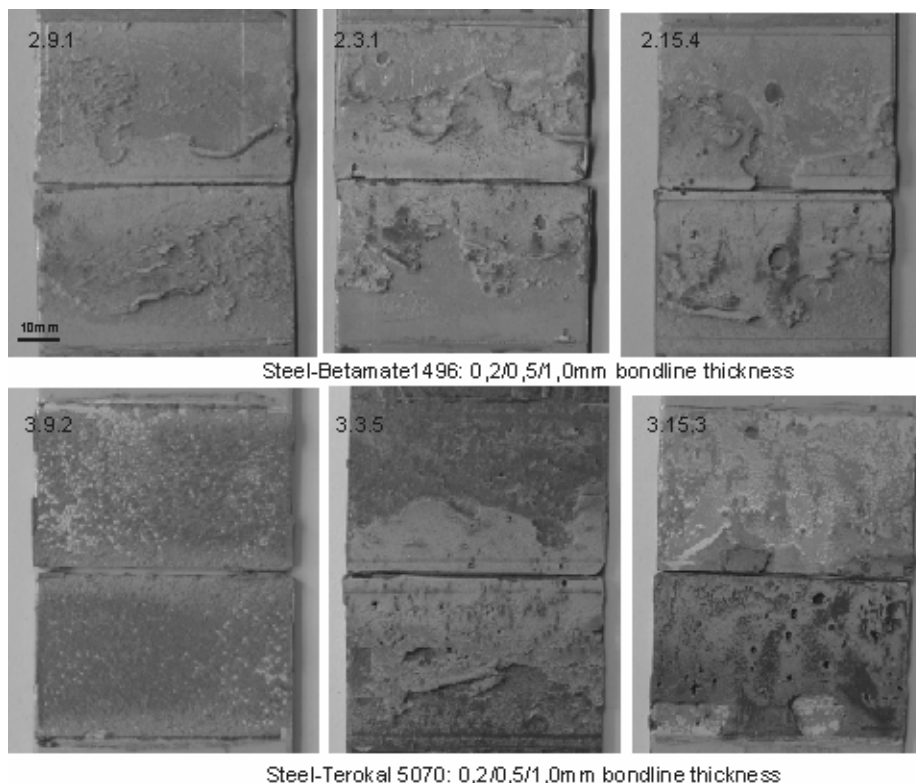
Macroscopic observations on the fracture surface of steel lap joints bonded with the adhesives “Betamate 1496” and “Terokal 5070” and inserted PTFE layer.
